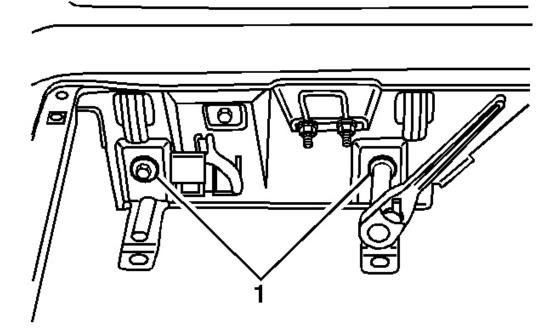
Identifying Lower PSIR Inflator Module Retaining Bolts Courtesy of GENERAL MOTORS CORP.
